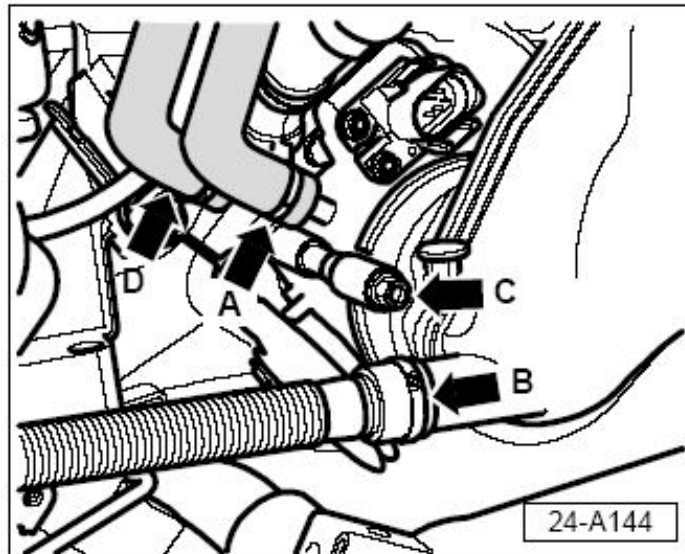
The canister purge regulator hose (A), crank case vent hose (B), cap screw (C), and vacuum hose (D).
